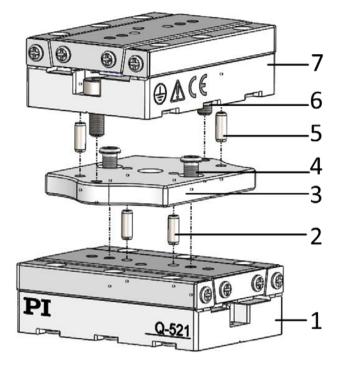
Example: Mounting a Q-521.240 on a Q-521.240
